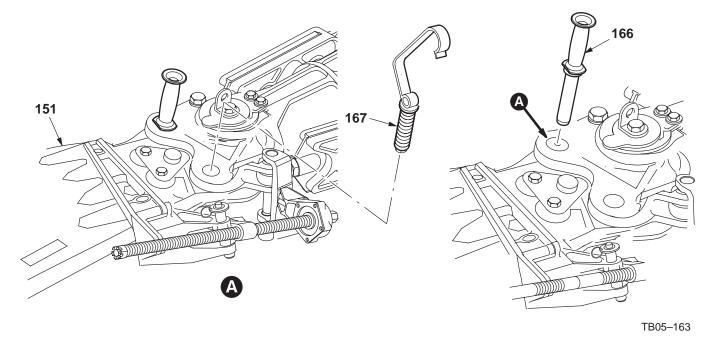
Quick Release Fold Pin at Leading Edge and Remove Aircraft Blade Pin from Trailing Edge
